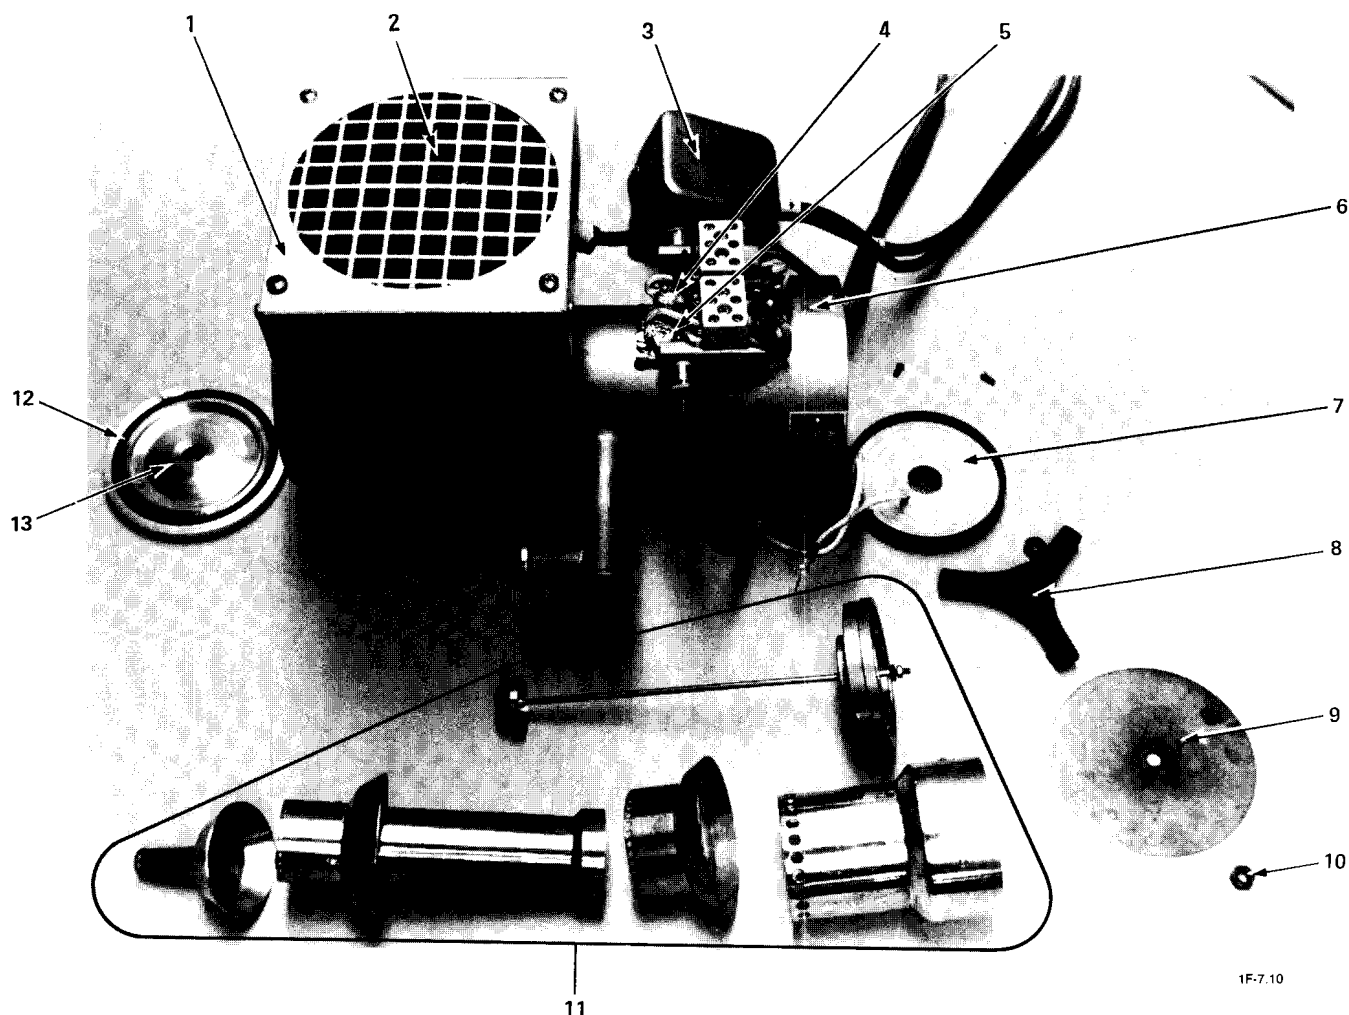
Disassembled LEYBODIFF 180L Diffusion Pump
